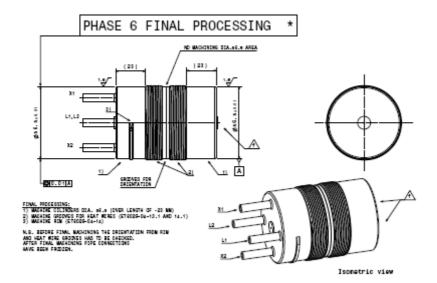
HX after welding and turning the grooves for the start-up wire heaters
